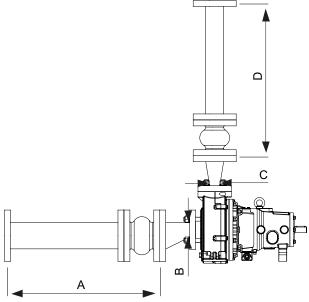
Straight pipe lengths in front and after the pumps (recommended)
